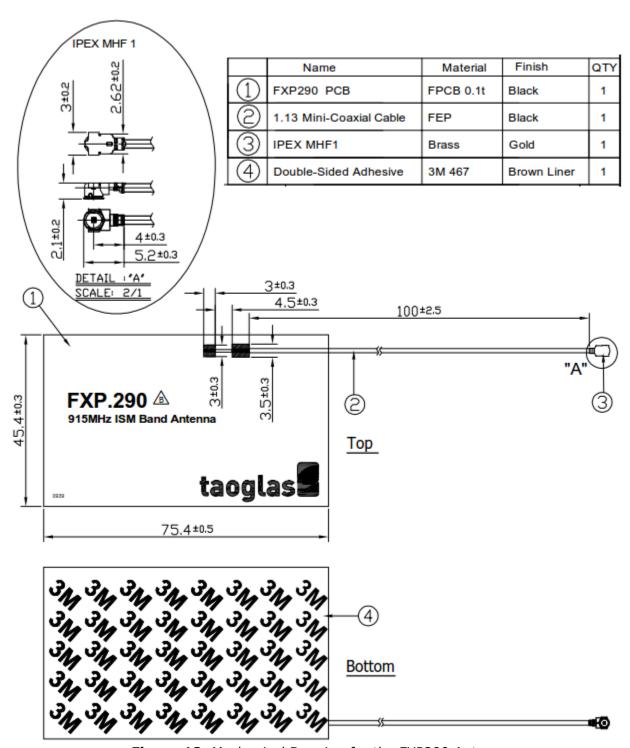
Mechanical Drawing for the FXP290 Antenna.
